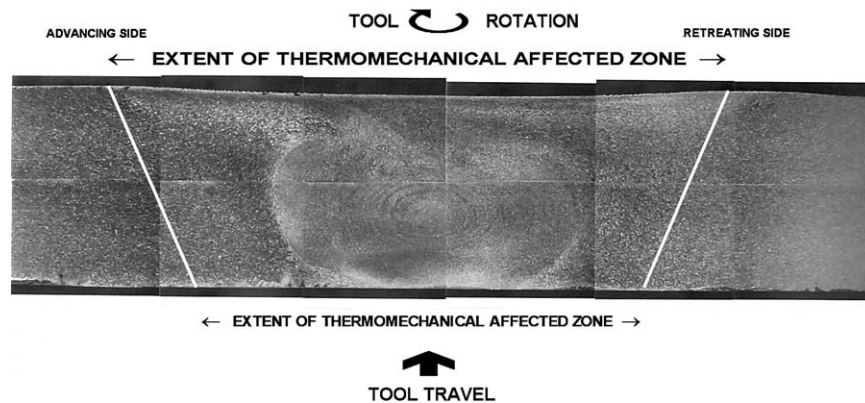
Macrograph of a SP friction stir weld in 8 mm 5383-H321 aluminium plate (5383 alloy is very similar in composition and weld characteristics to 5083).
